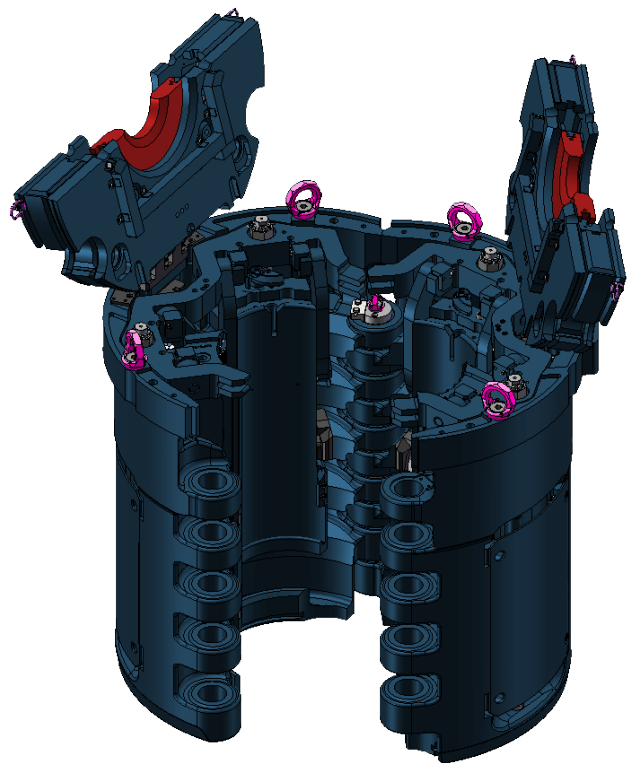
PS 1250 Prepared for Changing Slip Assembly
